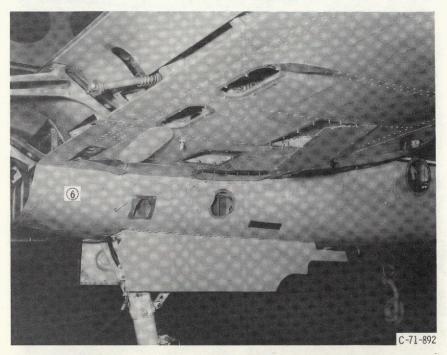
Outboard view of damage at aft bottom of right engine nacelle. (See also figs. 13 and 16.)
